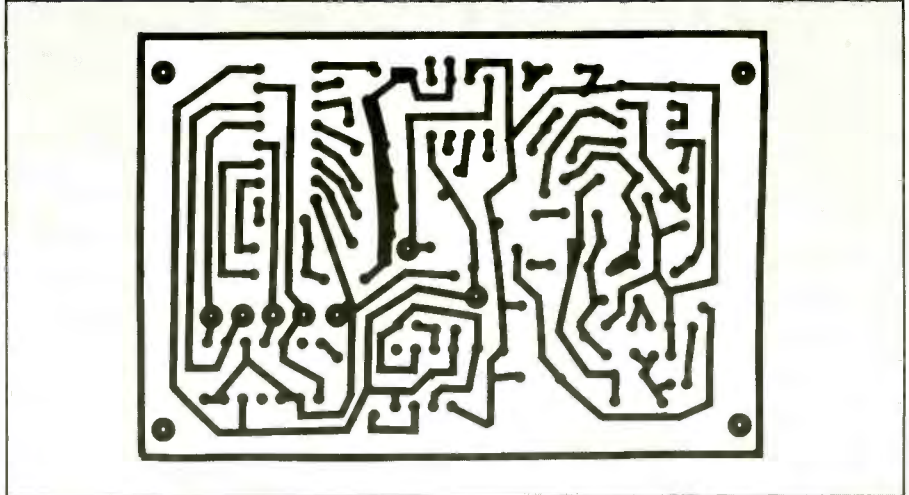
Actual-size etching-and-drilling guide for receiver/decoder board.
